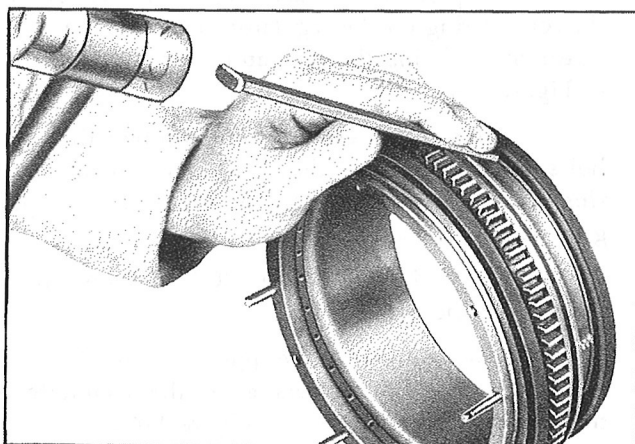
Removal of Seals from Regulator Gear, Models A632S-A1, -A2
